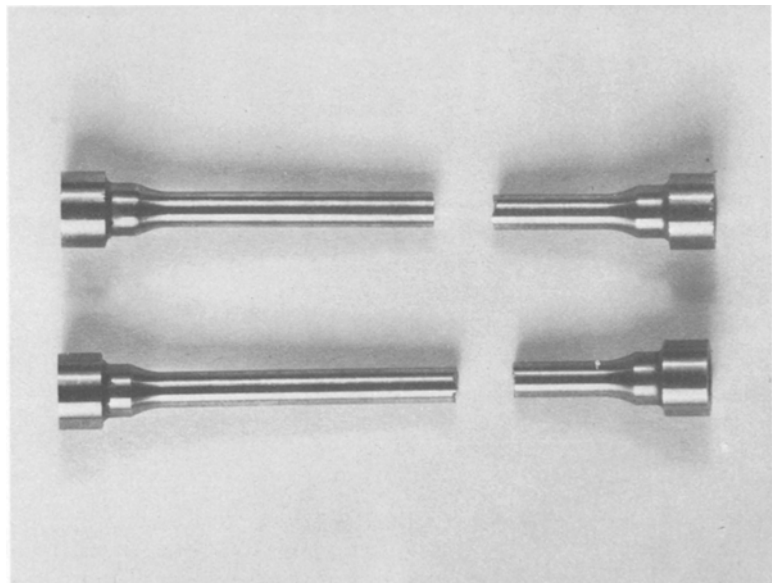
Tensile test specimens showing brittle fracture within the gauge length.
